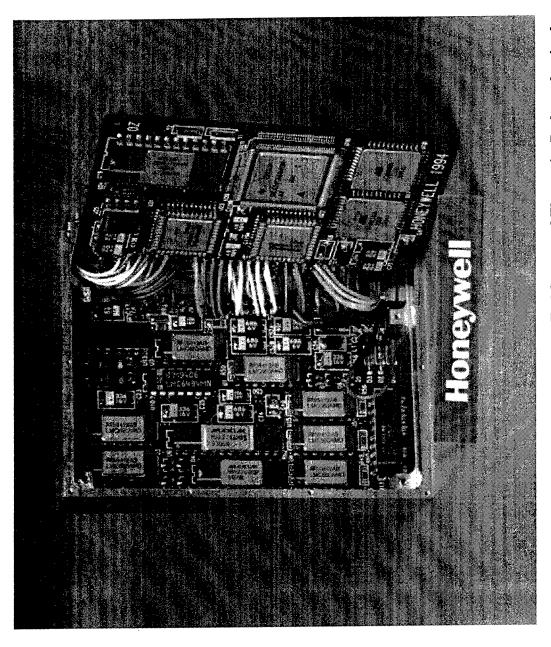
Photo of the Quick Reliability Assessment Tool Sensor and Electronics Package showing how the two printed circuit boards fit into the Sensor and Electronics Package. The left board has the interface electronics for the sensors. The right board has the DSP, real-time clock, analog-to-digital converter, and the memory.
